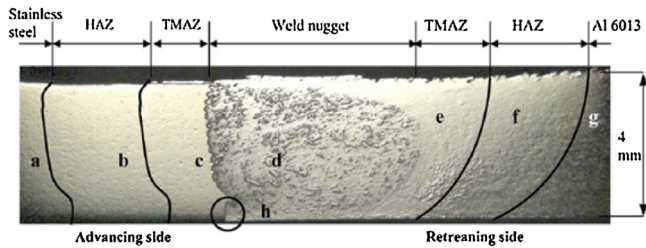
Cross section of friction stir welded Al6013-T4 alloy to X5CrNi18-10 stainless steel [258].
